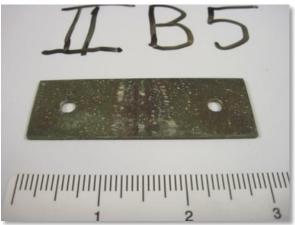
70-30 Cu-Ni 1-inch by 3-inch coupon with weld
